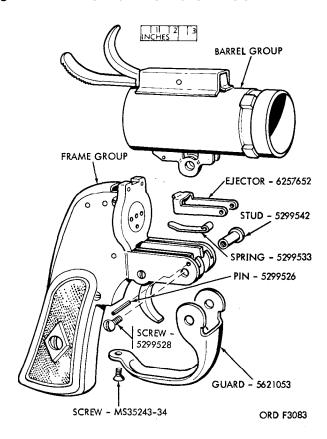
AN-M8 pyrotechnic pistol - exploded view.
